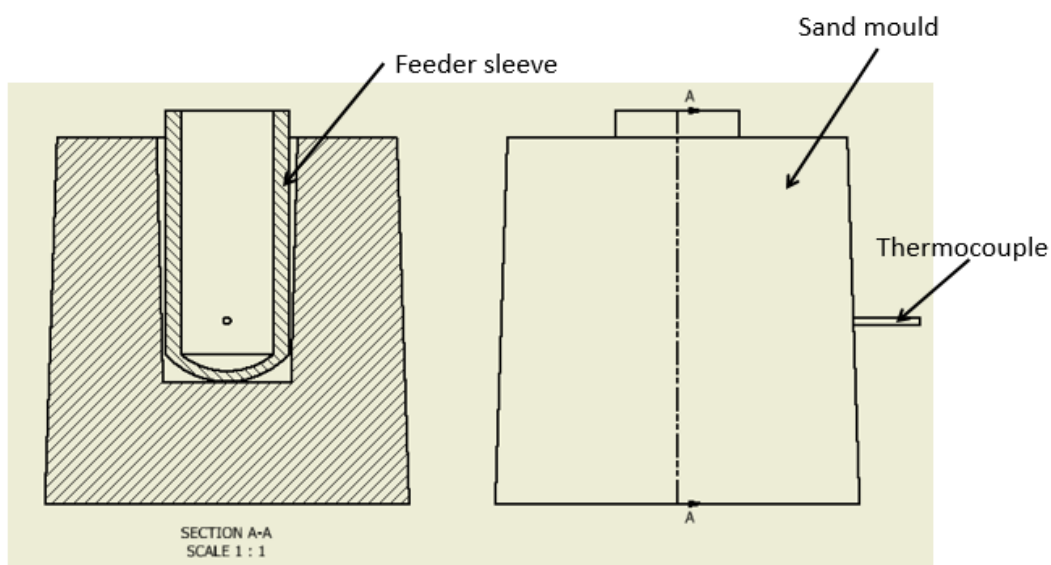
Final design of the undercooling mould assembly. A thermally insulating sleeve is positioned within a sand mould support. A K type thermocouple is positioned 75mm above the bottom of the sand mould base, with the tip positioned centrally to the sleeve (A-A plane).
